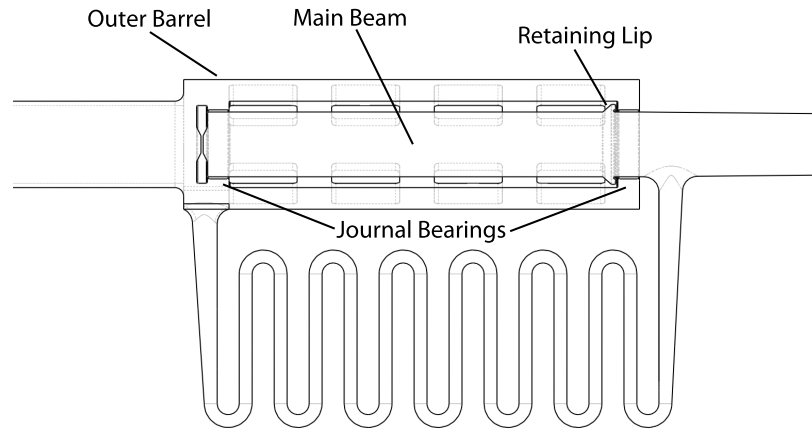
Cutaway view of wing hinge CAD model showing concentric cylinders, journal bearings, retaining lip and spring.
